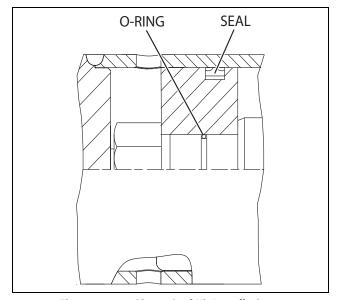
Piston Seal Kit Installation (Prior to S/N 0300142664)
